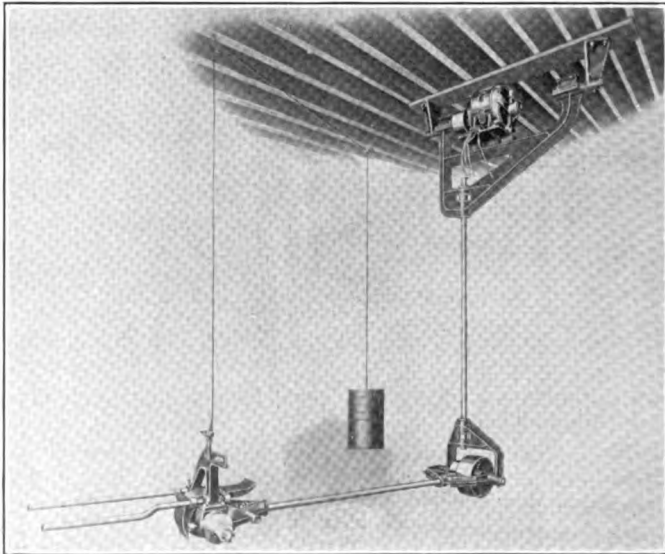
Safety Emery Wheel Co., Springfield, Ohio
